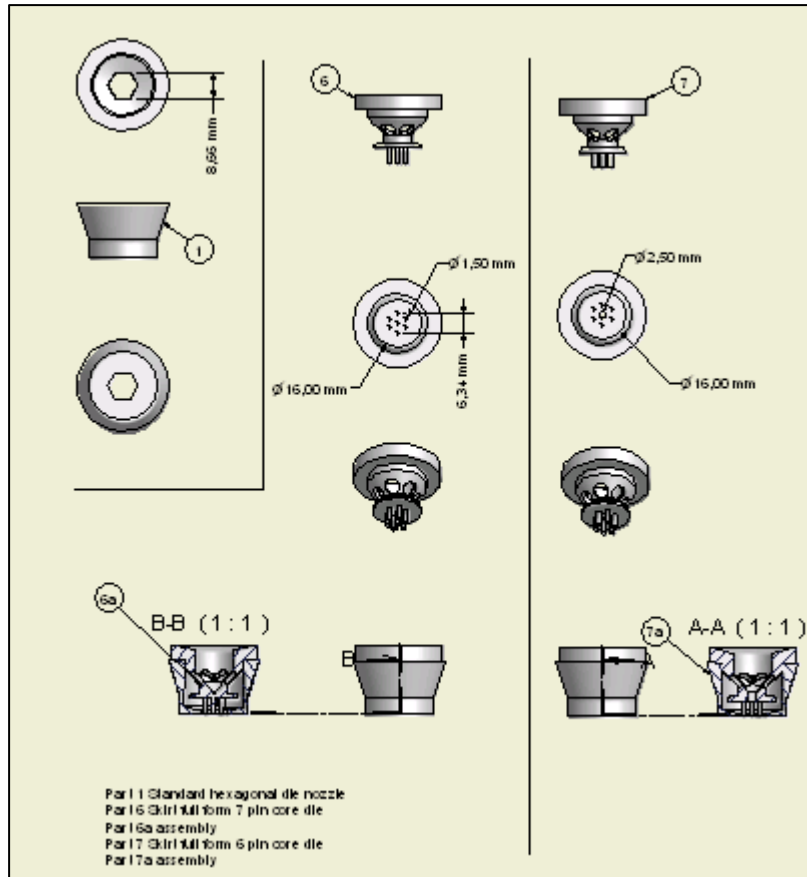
Drawing of 6-pin-die and 7-pin-die for the 2st experiment on improved 1-ring-element stacking Improved 1R-SEST fibre fabrication
